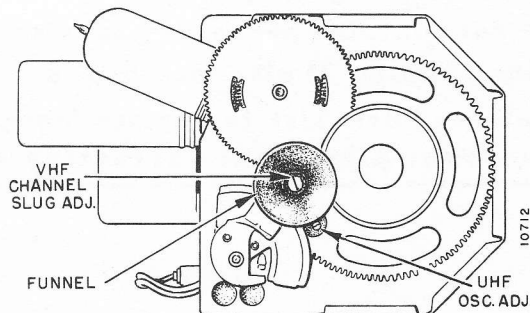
Front View of VHF-UHF Tuner Showing Location of VHF Channel Slug Adjustments.
